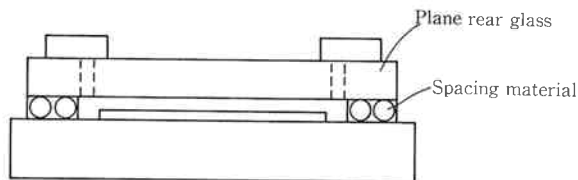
Cross-sectional view of a EL panel with a plane rear glass.
